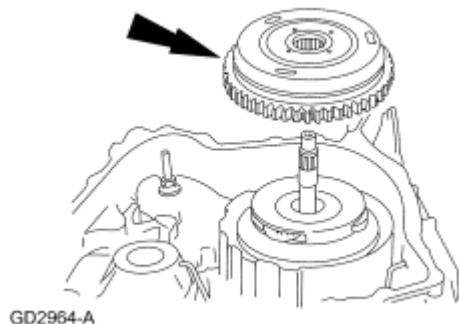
Reverse/Overdrive Ring Gear Assembly
